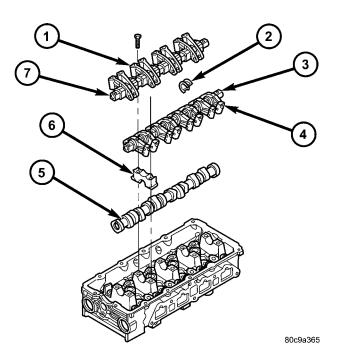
Rocker Arm Shafts/Lash Adjusters/Camshaft
